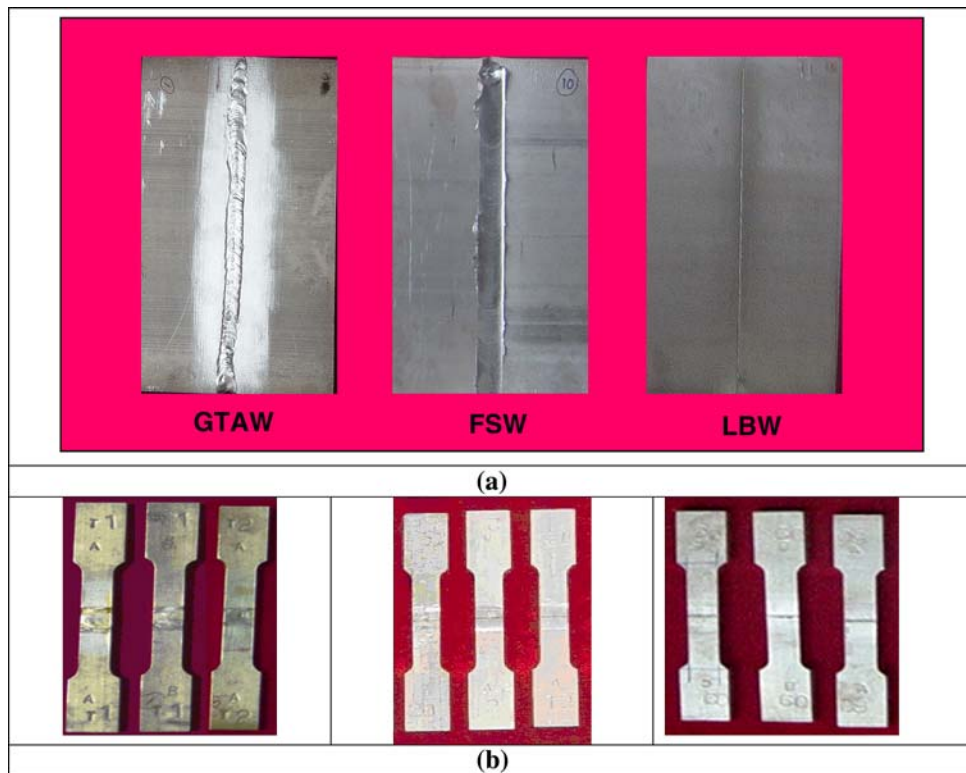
Photographs of welded joints and respective tensile specimens: (a) Welded joints and (b) Tensile specimens
